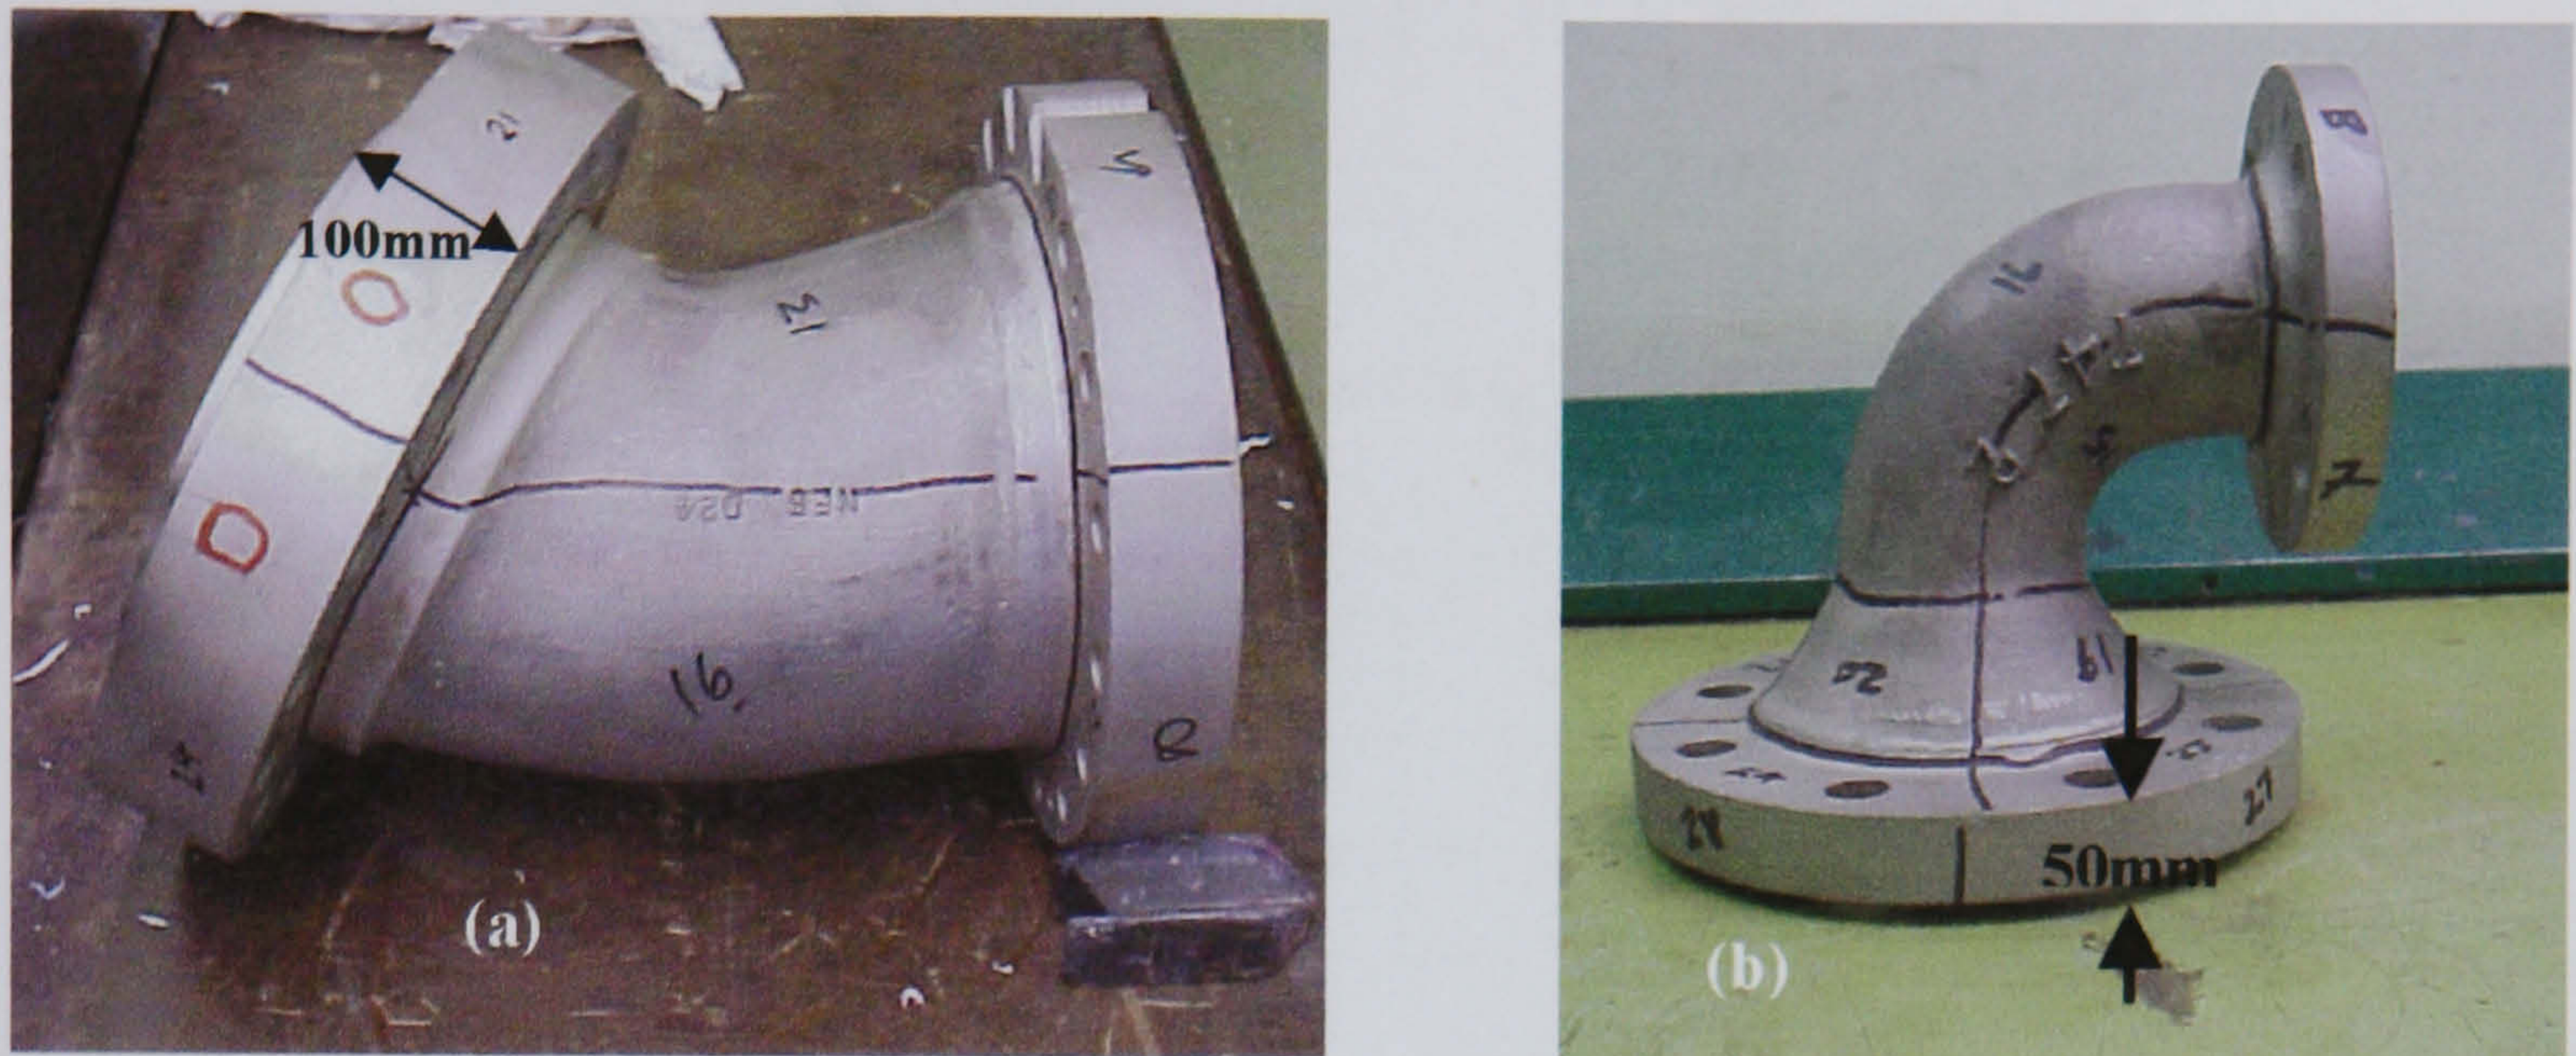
(a) – Large Cast Bend (b) Smaller Cast Elbow
